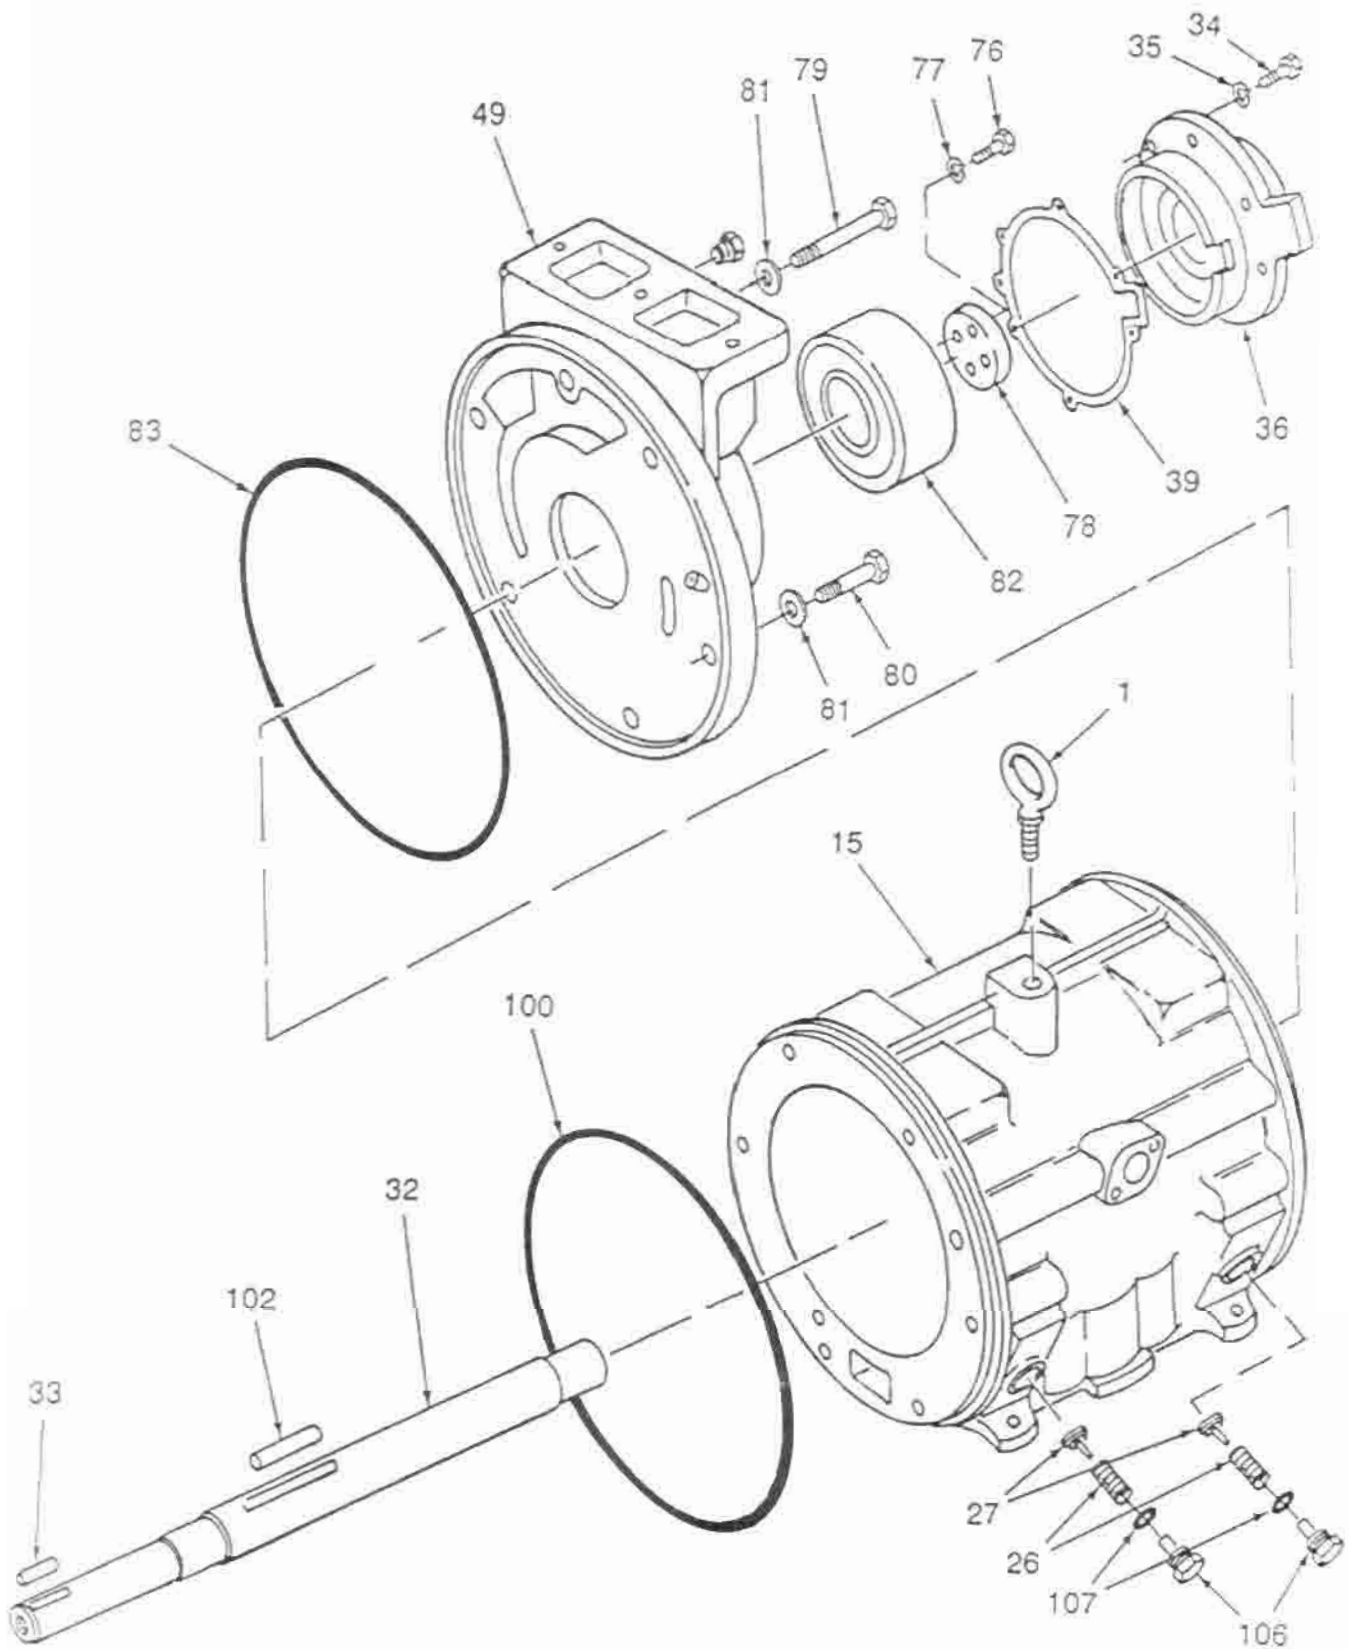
Air Compressor Group Disassembly (Sheet 3)
